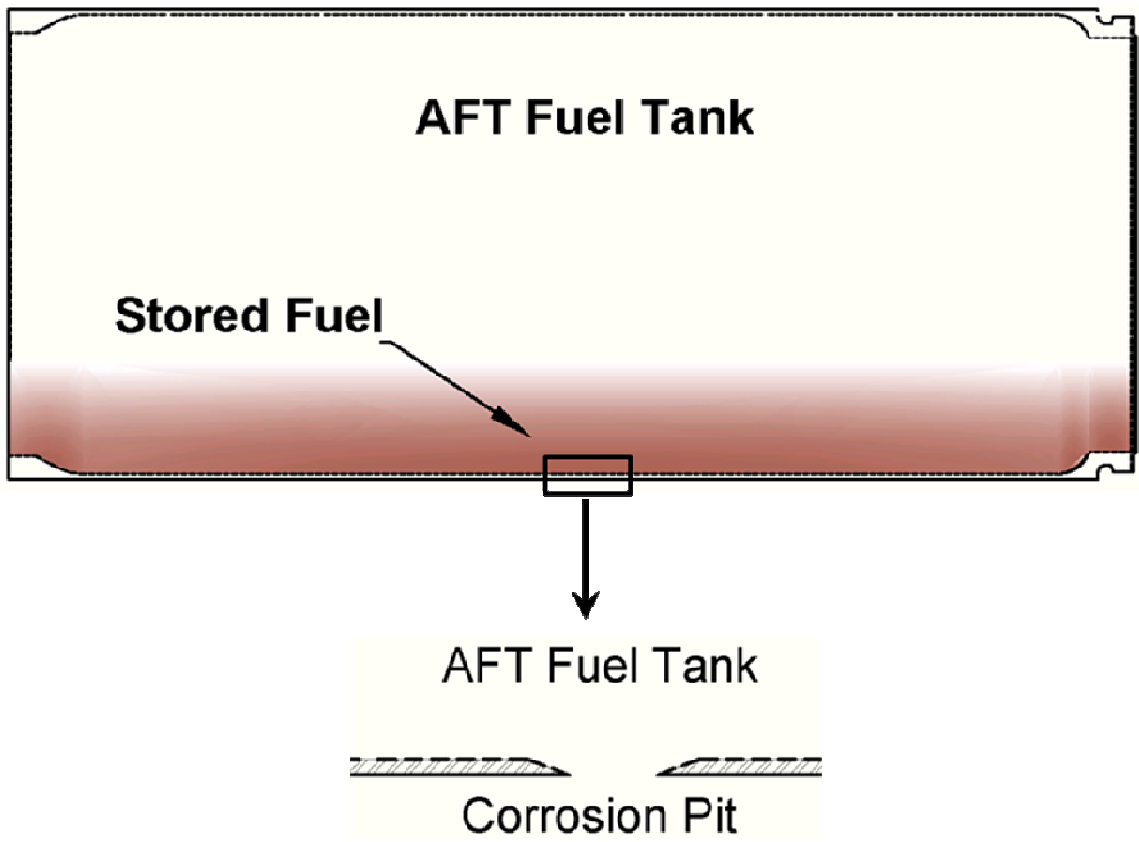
A torpedo fuel tank with stored fuel. The inner surface of the fuel tank develops corrosion pits which can be through-thickness.
